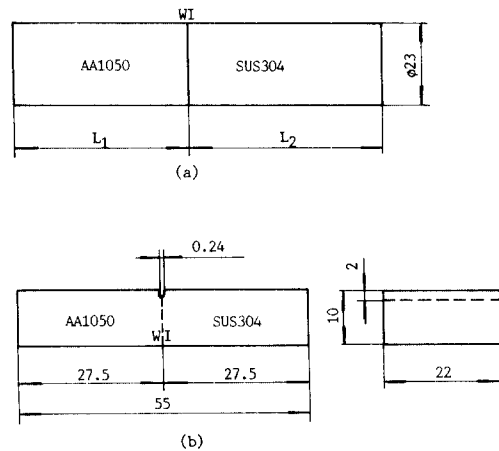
(a) Ultrasonic test specimen for Charpy impact test
